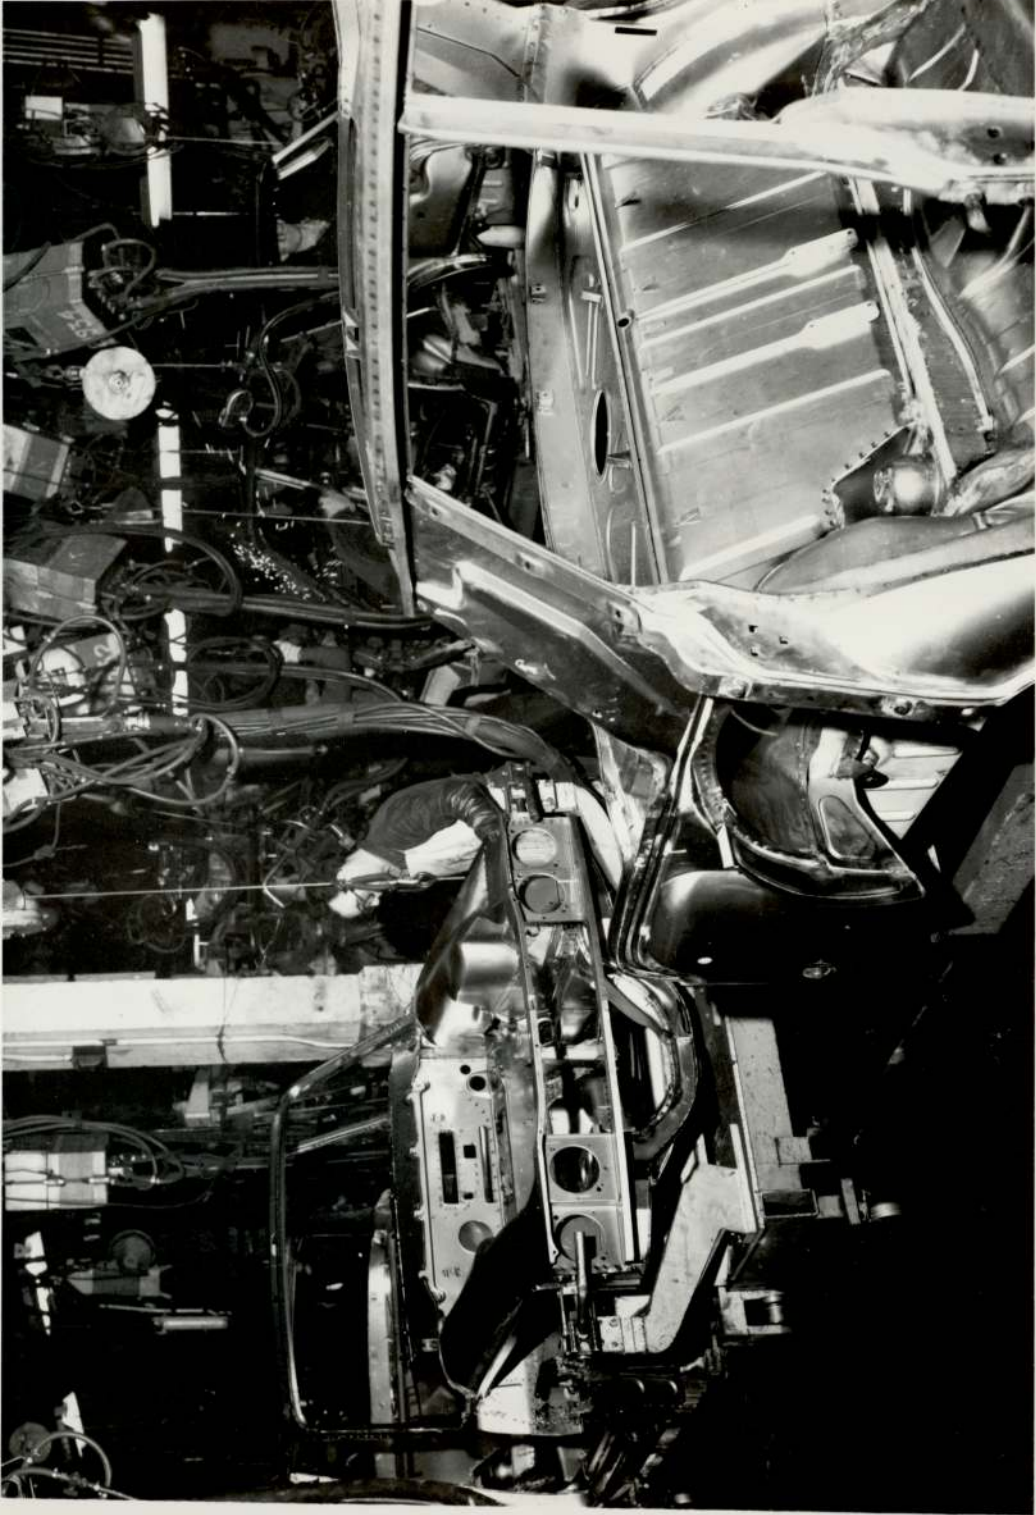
PLATE VI WELDING STATION - COWLEY INTERMITTENT CONVEYOR
